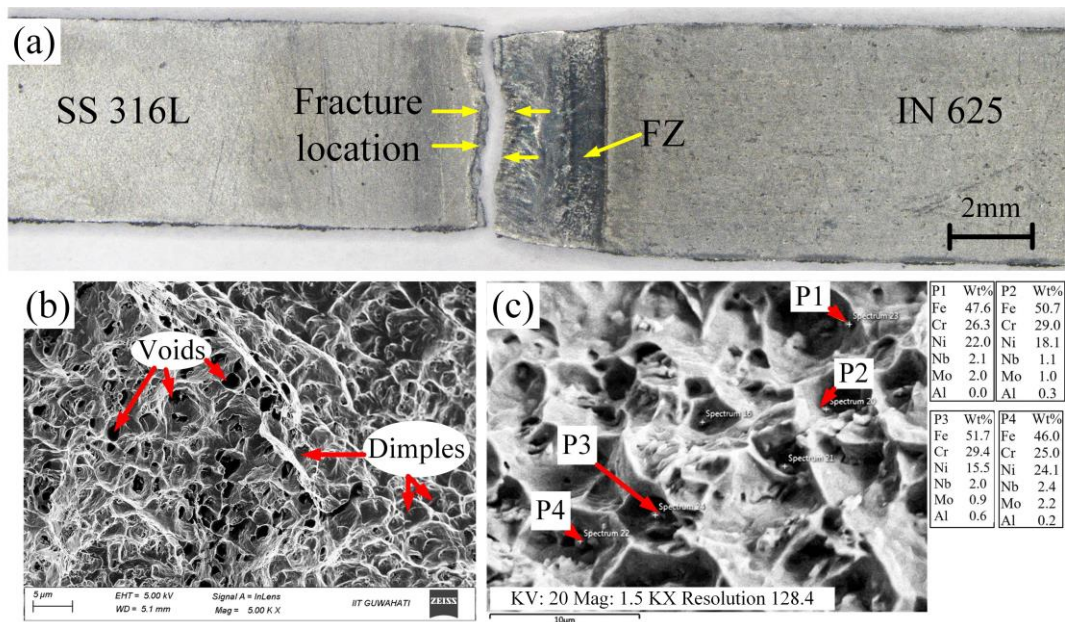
(a) Enlarge view of the fracture location (b) Fractography and (c) EDX point analysis of the tensile fracture specimen
